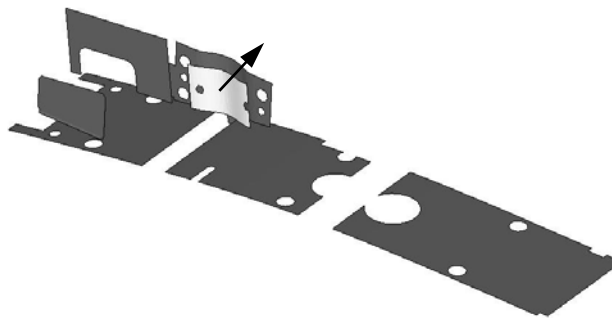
Reshaping tool for the expansion of the side walls of the bumper beam.
